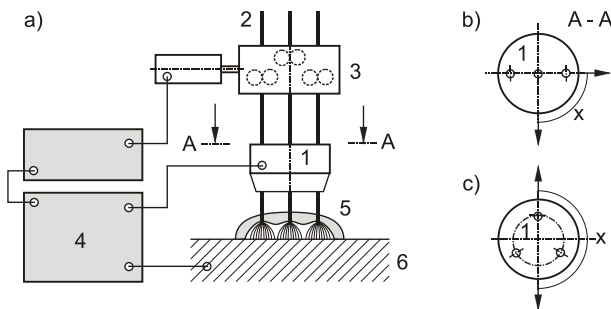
Schematic representation of device for triple-wire welding (a), wires in the contact tube being arranged in a line (b) and in a triangle (c), and possible directions of welding (x): 1 - joint contact tube for three wires, 2 - welding wires, 3 - feeding system, 4 - joint power source, 5 - welding arcs with cavity, 6 - workpiece
